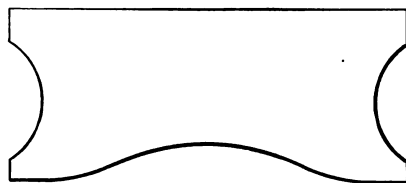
Plan of Bottom Board.—Scale, 1 Inch to the Foot.
